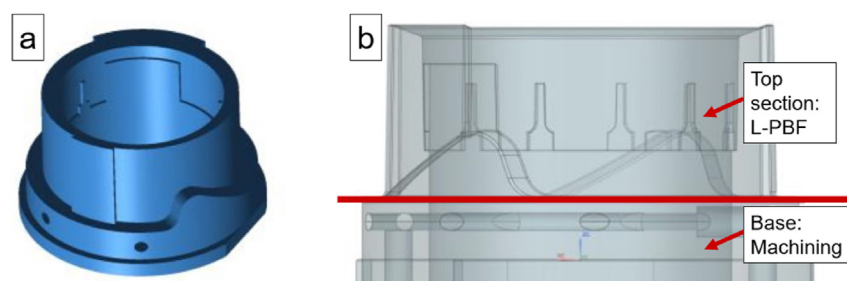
Cooling insert geometry and manufacturing process prescription: (a) Isometric view of the design, (b) Differentiation between Top section and Base.
